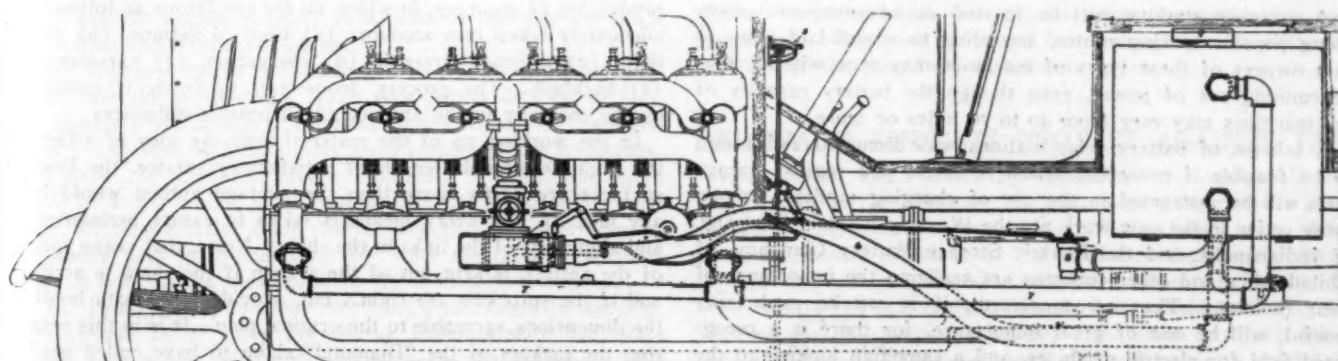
Diagrammatic scheme showing the manner in which the generator is used and piping connecting to motor.
